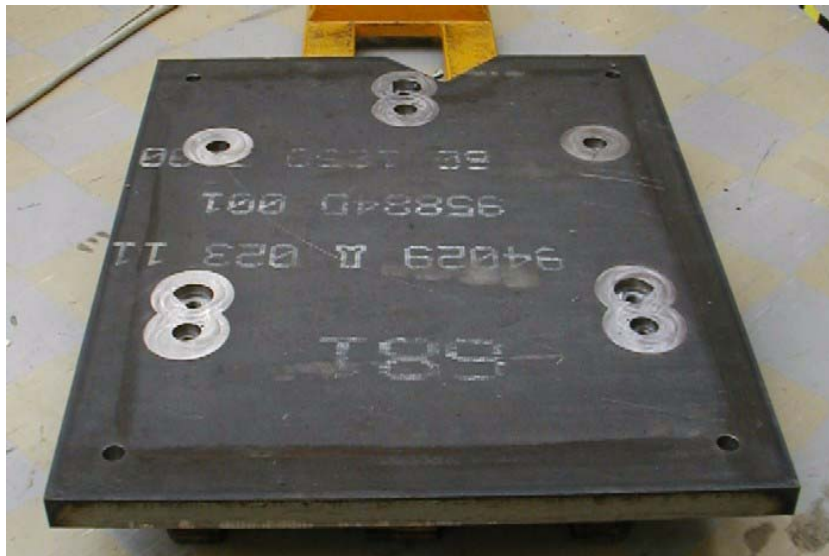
Prototype steel interface plate to manipulator foot - top side.
